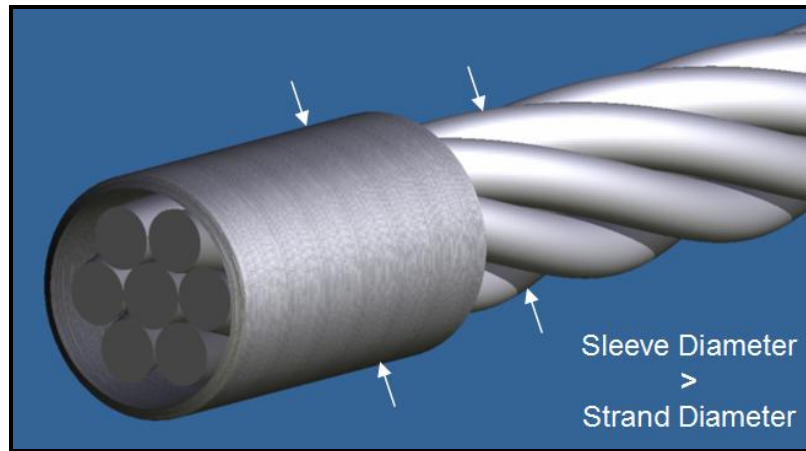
Stages of assembly of non-swage end fitting [24]
